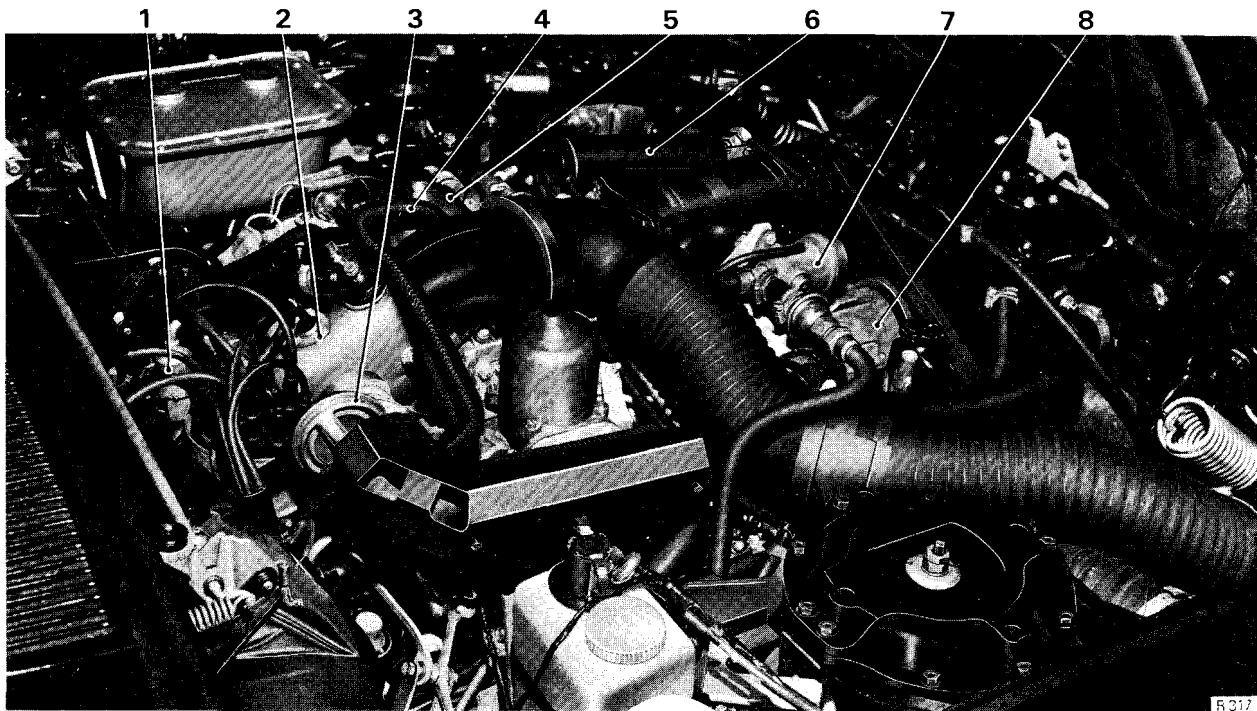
VIEW INSIDE ENGINE COMPARTMENT (From Right-hand Side of Car)
